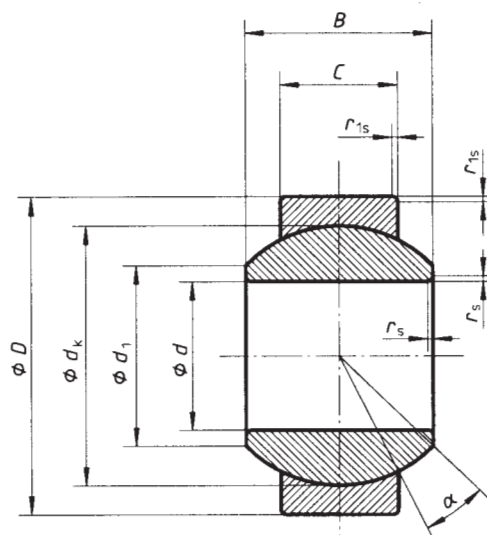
Radial spherical plain bearings, dimension series E, G, C, K, H
